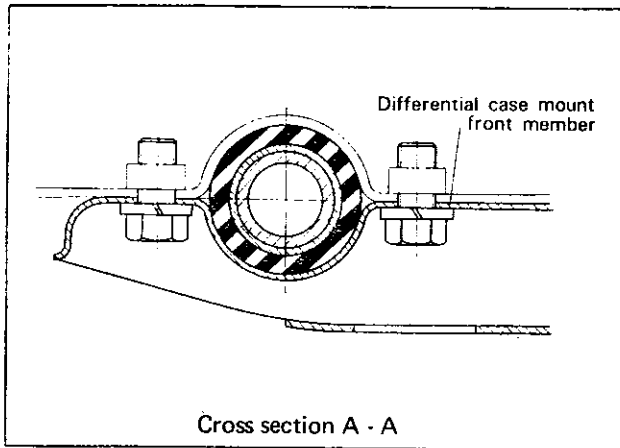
Cross sectional view of the transverse link inner bushing (II)
